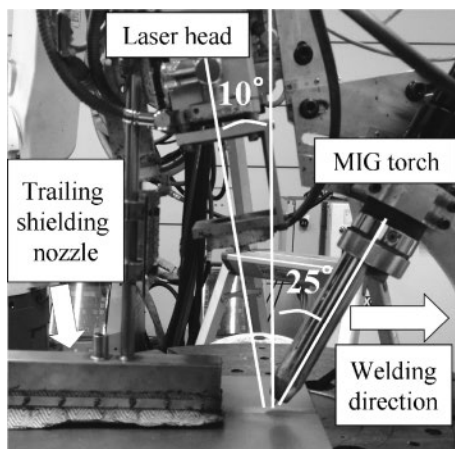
Setup of 10 kW fiber laser head and MIG arc torch for hybrid welding.
